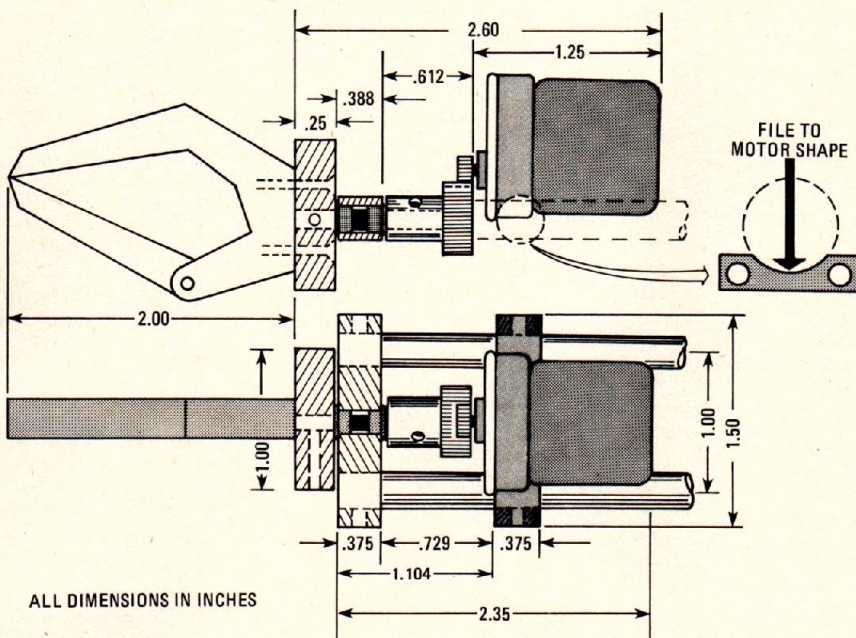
SMALL GEAR ON STEPPER-MOTOR SHAFT does not have to be purchased separately—it comes with the motor. Note use of bearings through first cross-bar rod.
